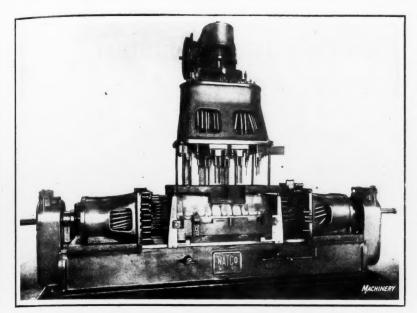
Machine employed for drilling "Straight-eight" Engine Crankcases
